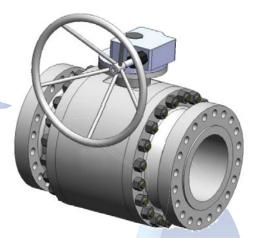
6000 Series Side Entry Ball Valve shown with Gear Operator
